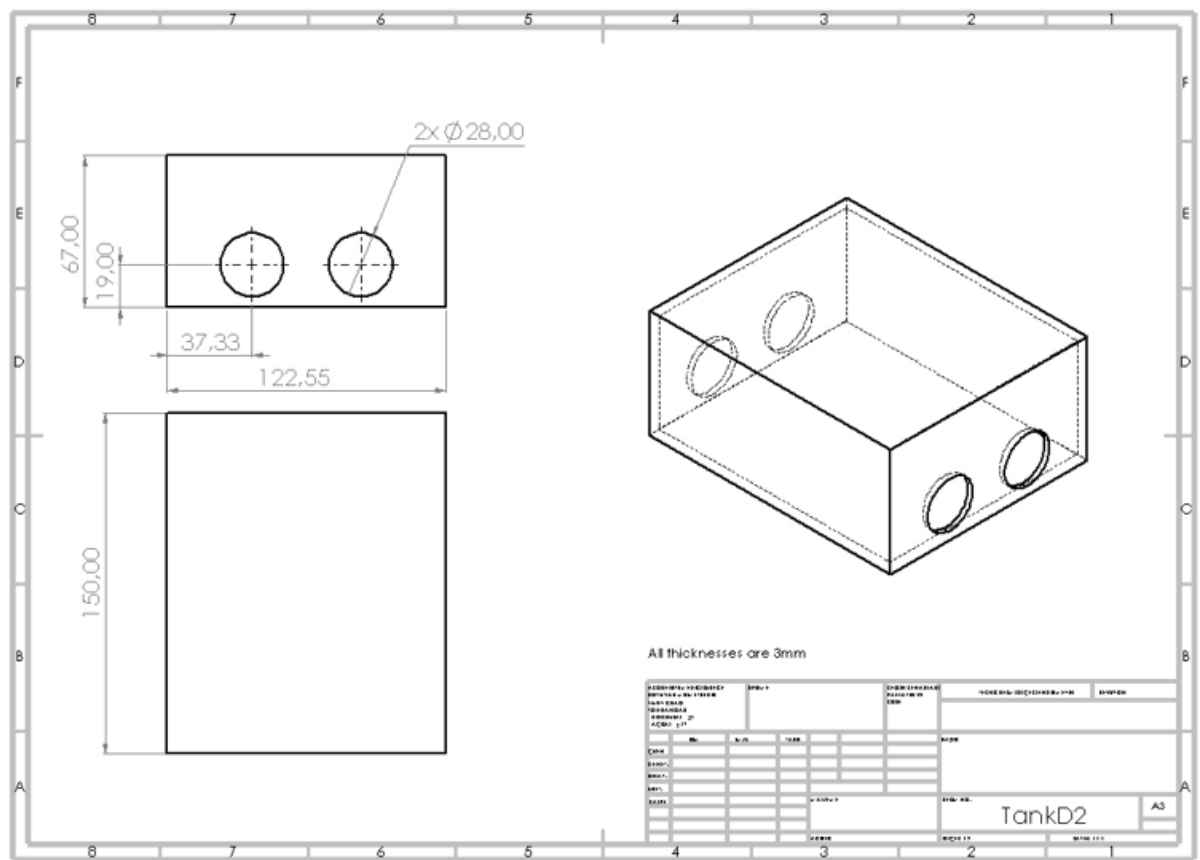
Technical Drawing of Double Tube Eccentric Tube Configuration
